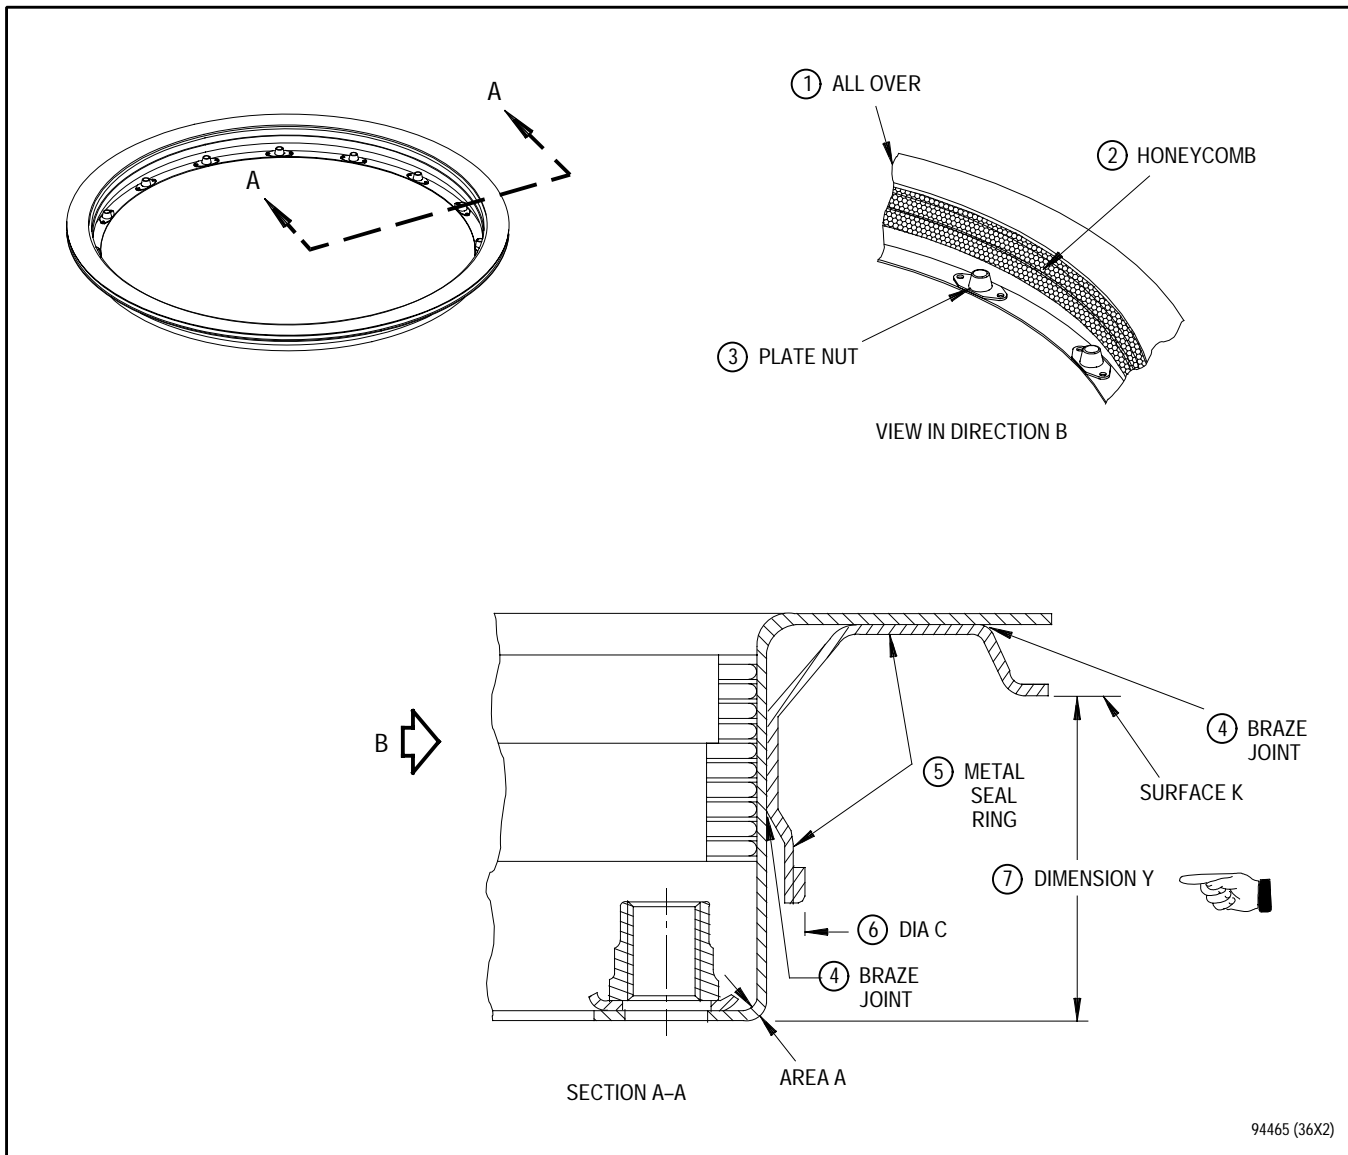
First Stage Turbine Outer Air Sealing Ring - Inspection
